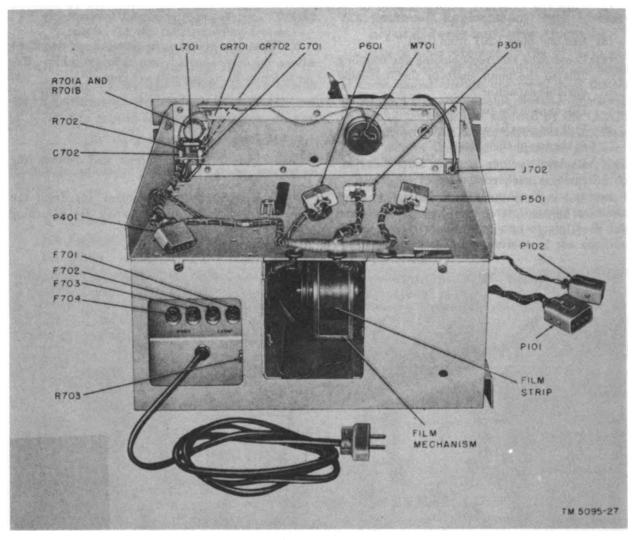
Frequency Meter FR-5/U, location of parts, rear view.
